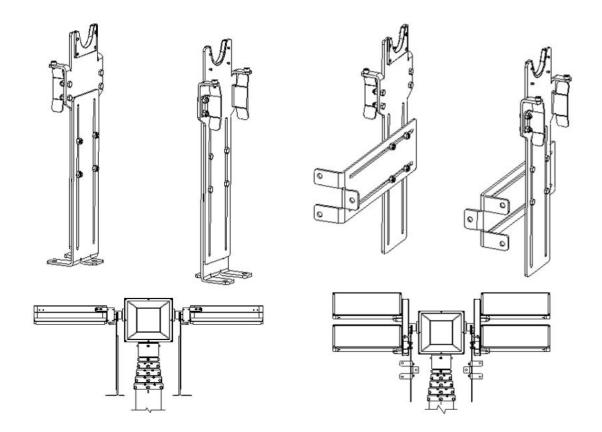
Mounting Variations. Clockwise from upper left: Saddle Deck Mount; Saddle Wall Mount; Saddle and RCP Assembly Lights Stowed Horizontally; Saddle and RCP Lights Stowed Vertically
